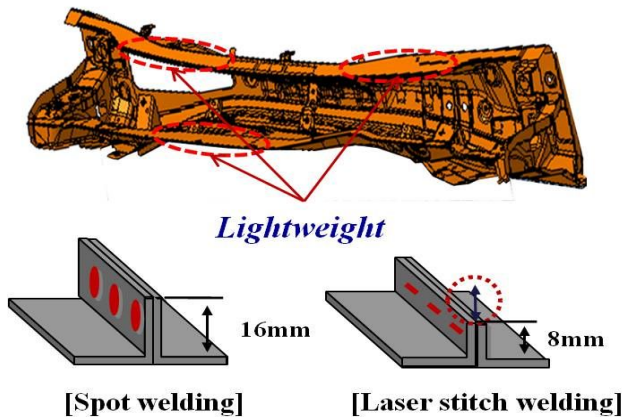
Concept of Laser Stitch Welding for Lightweight
